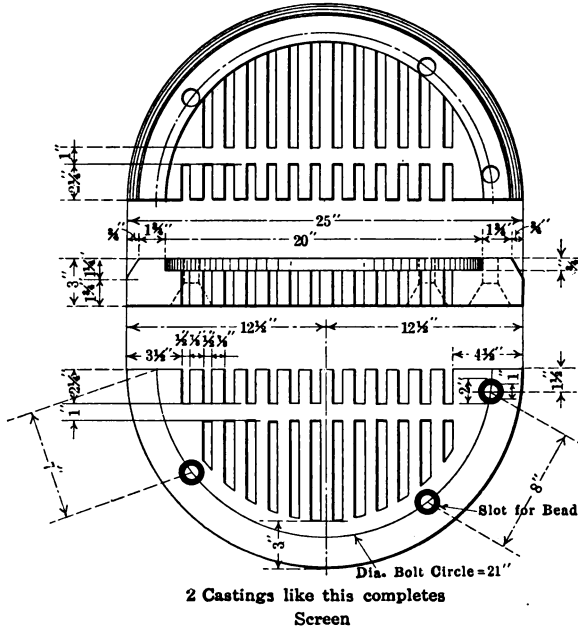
Cast-iron screen for discharge end of tube mill.
